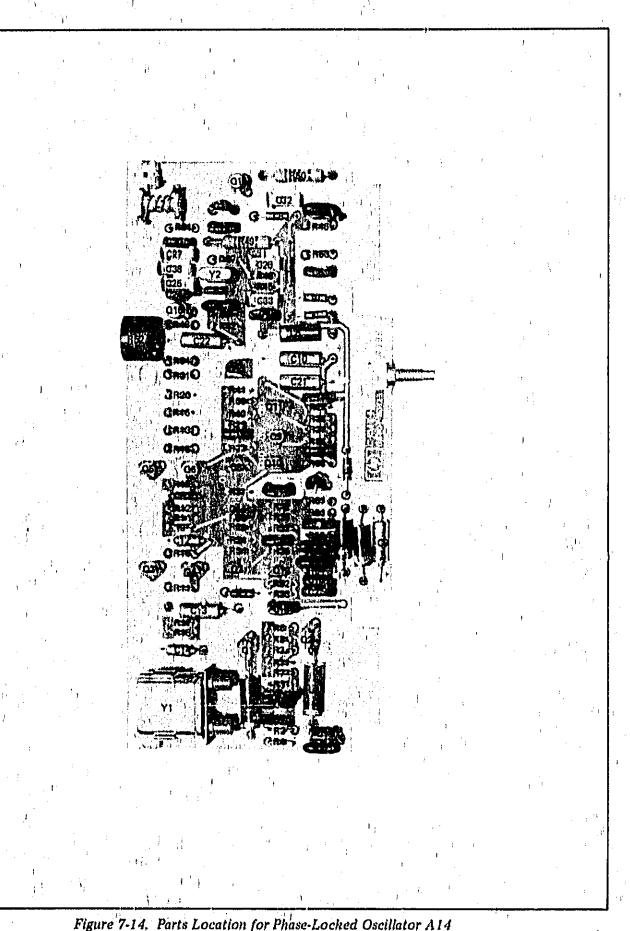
, Parts Location for Phase-Locked Oscillator A14 (Change A, Serial No! 983-00446 thru 1103A00605)
